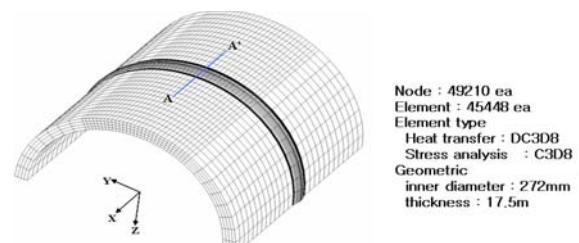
3-dimensional nonlinear FEA model used for welding residual stress analysis of a multi-pass welded joint
